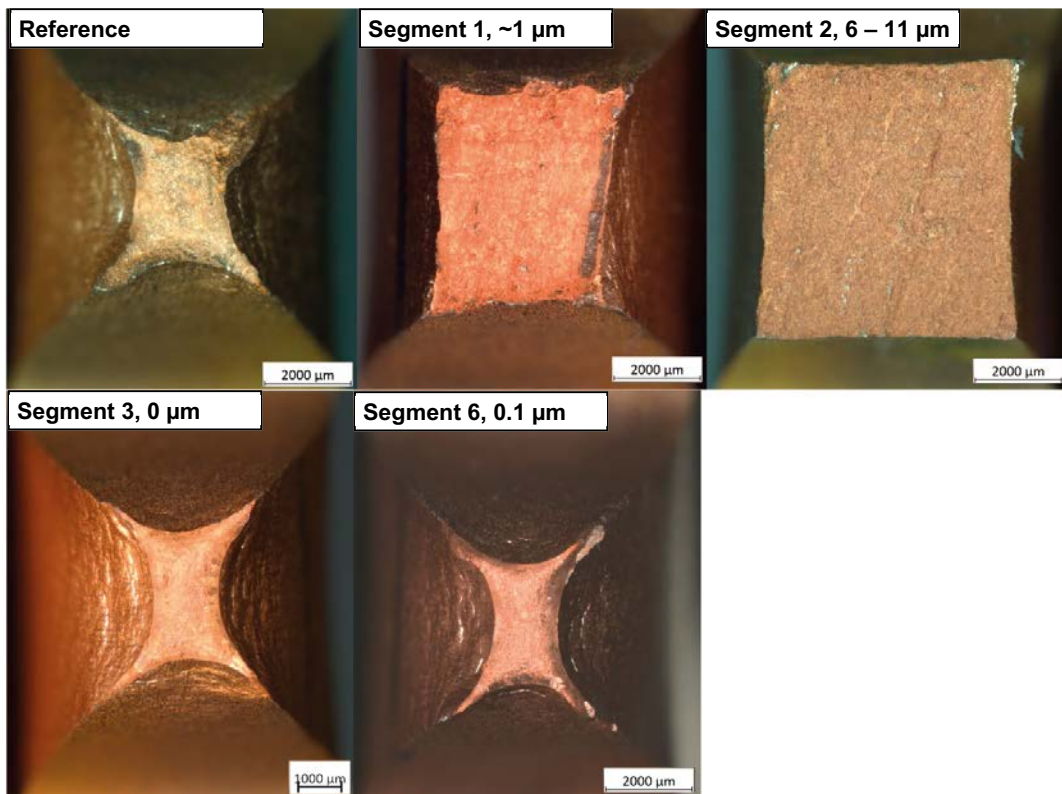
Fracture surfaces of tensile test specimens tested at 75 °C. a) Reference, b) segment 1, position 177°, c) segment 2, position 161°, d) segment 3, position 70° and e) segment 6, position 240°.
